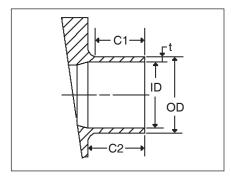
Opt-24 Butt Weld End Connection
